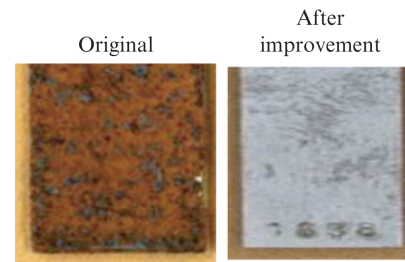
Appearance of test pieces after 2 weeks of corrosion test under actual environment
